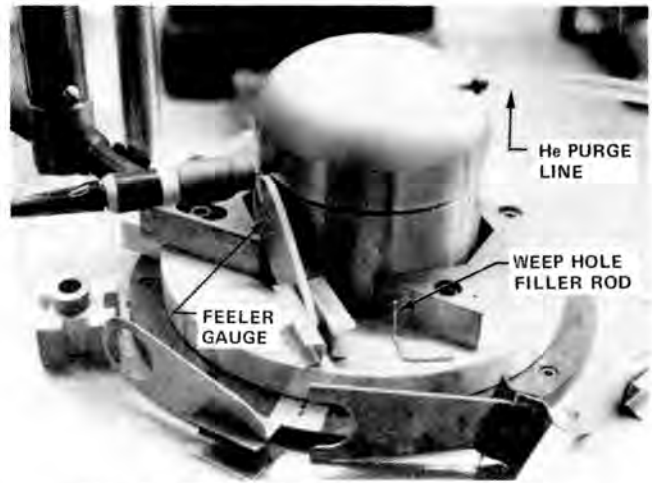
Positioning of welding torch for circumferential weld.
